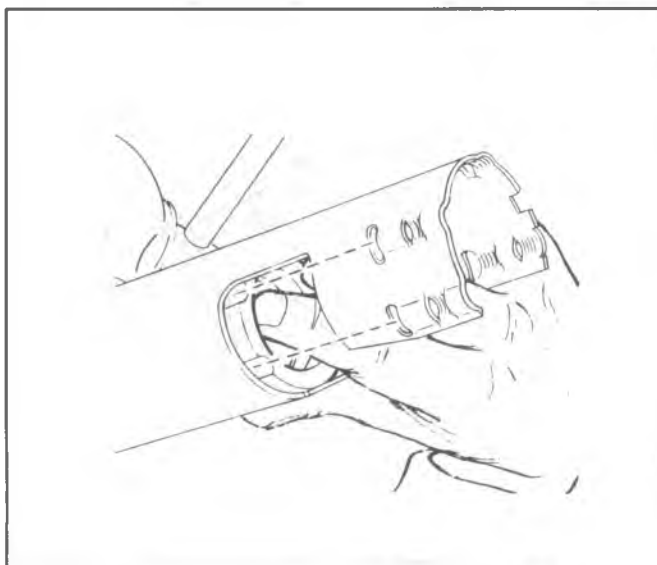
B5-28--Installing Gearshift Housing Lower Bearing
